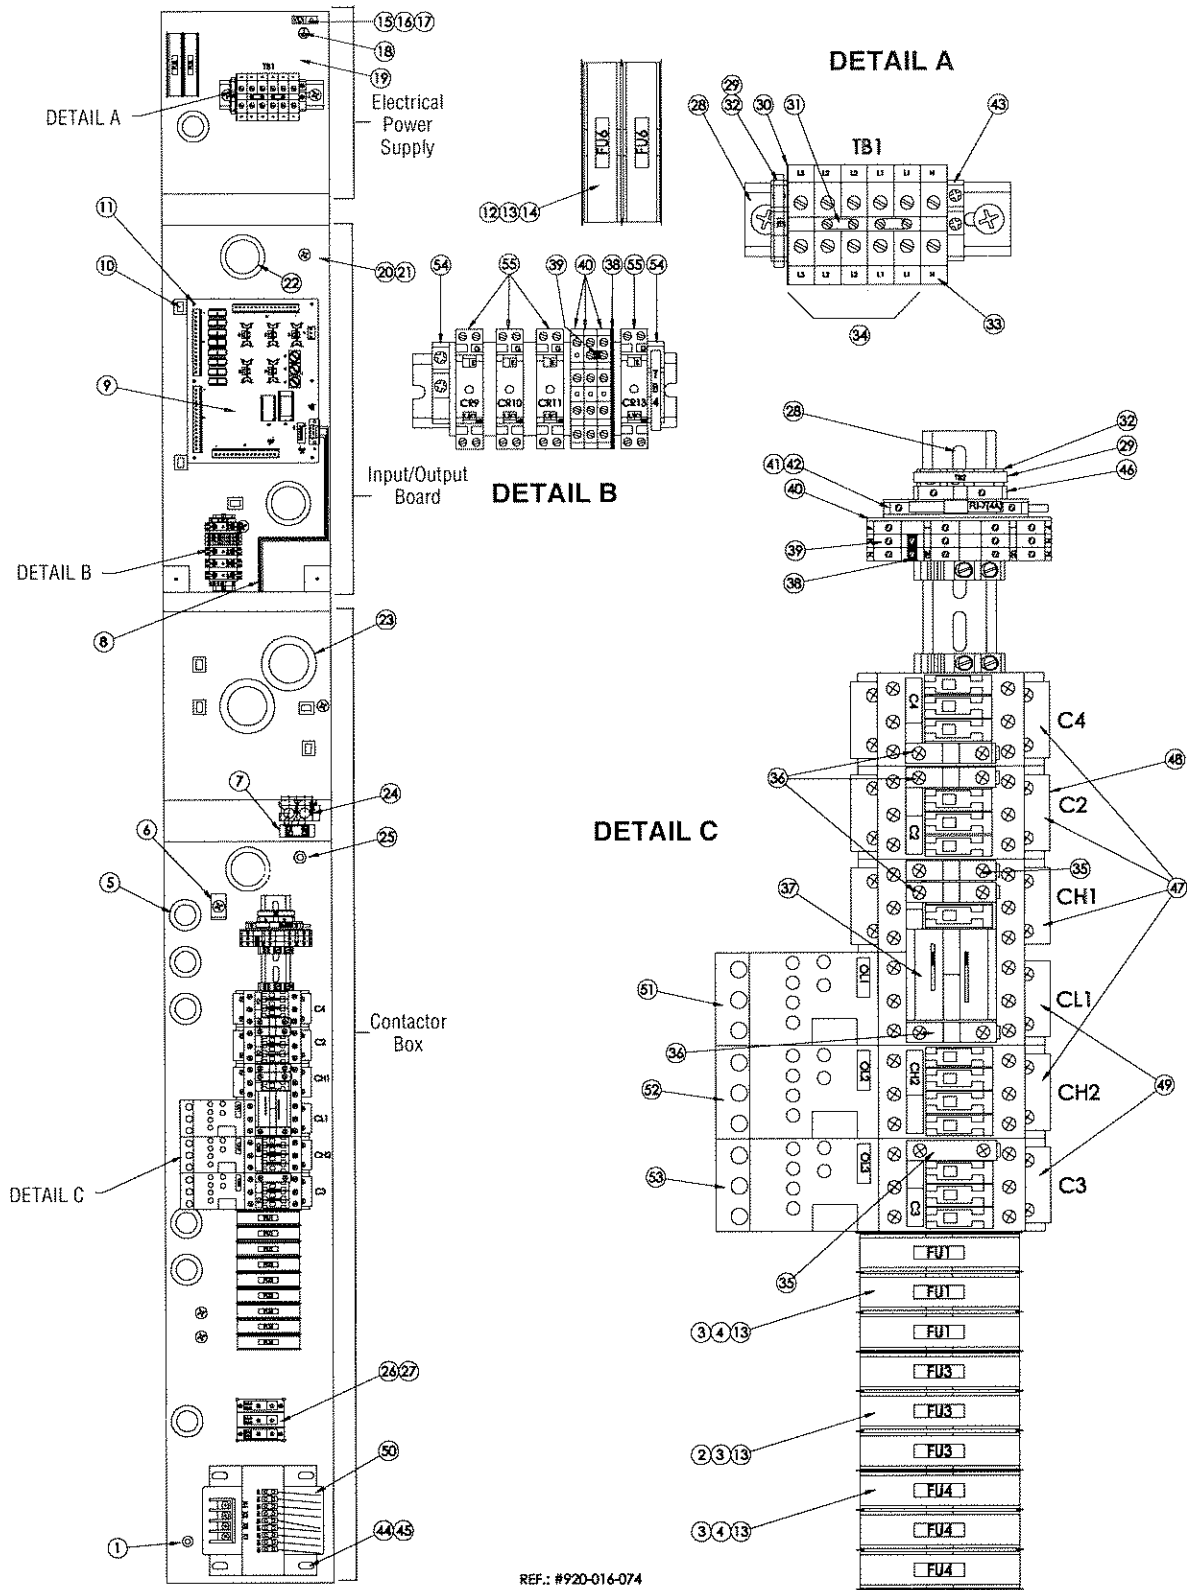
Electrical Power Supply Box, Input/Output Board, and Contactor Box
